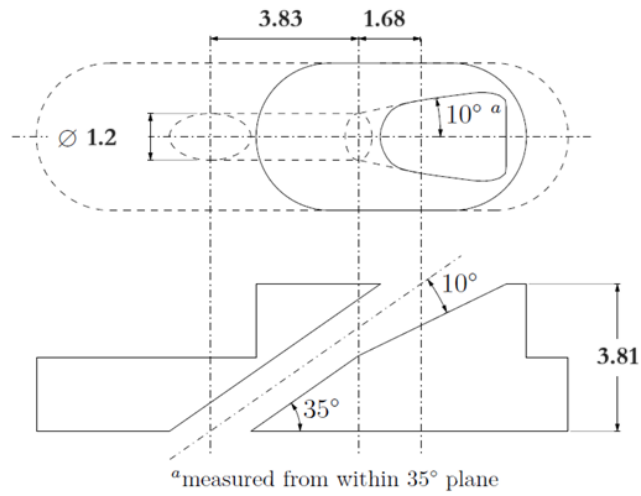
Laidback Fan-shaped Hole Geometry of the 7-7-7 design (dimensions in cm), (Schroeder & Thole, 2014)
